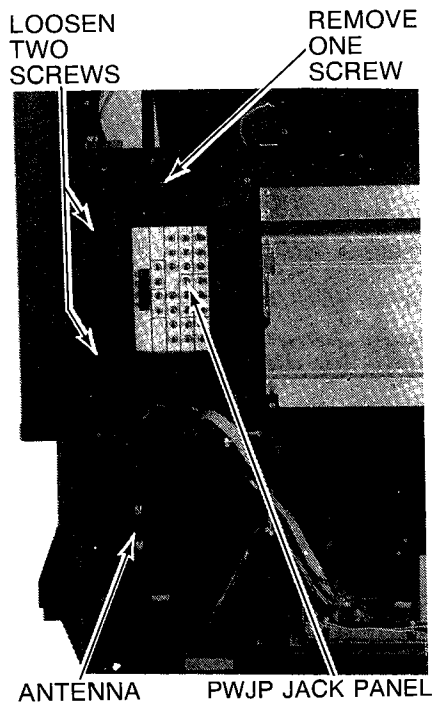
PWJP/PWVIO Video/Sound Assembly
